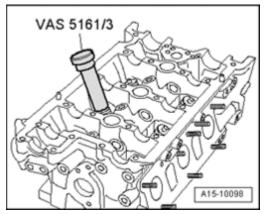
Placing Drift VAS 5161/3 On Valve Spring Plate And Loosening Stuck Valve Keepers Using Plastic Hammer
